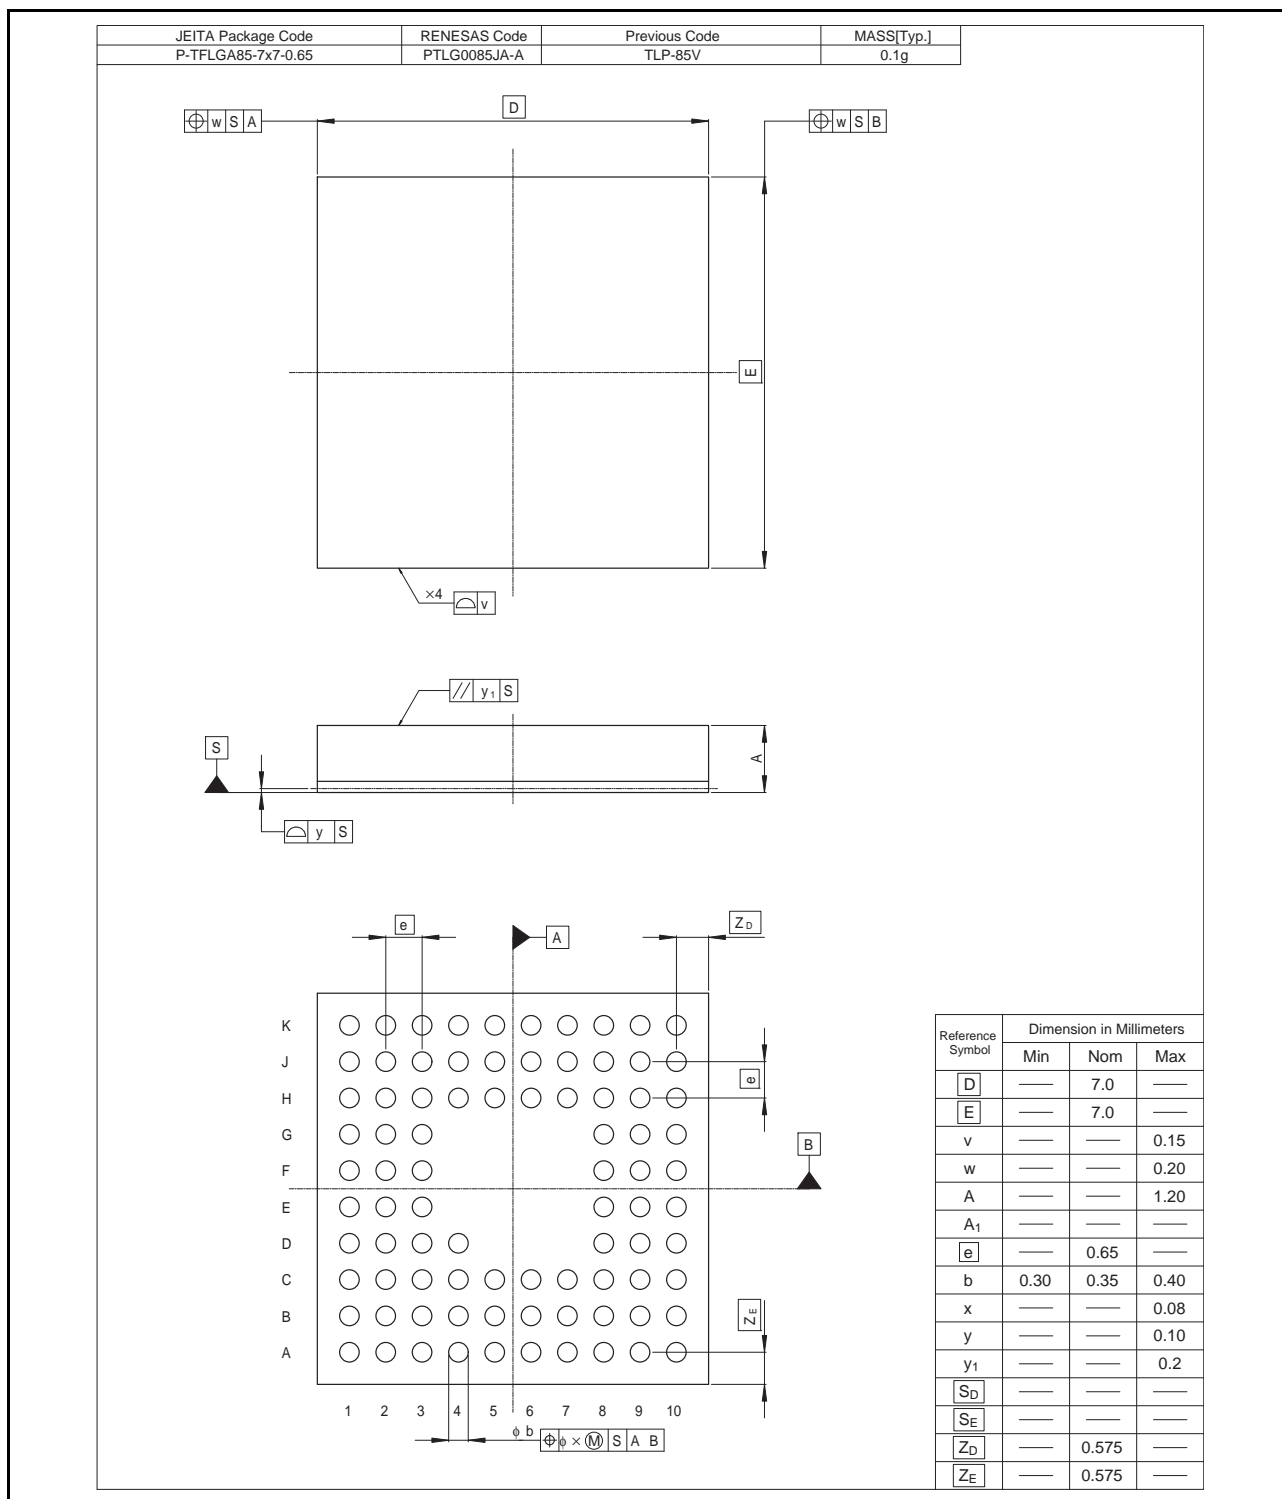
Pin TFLGA (PTLG0085JA-A) Package Dimensions
